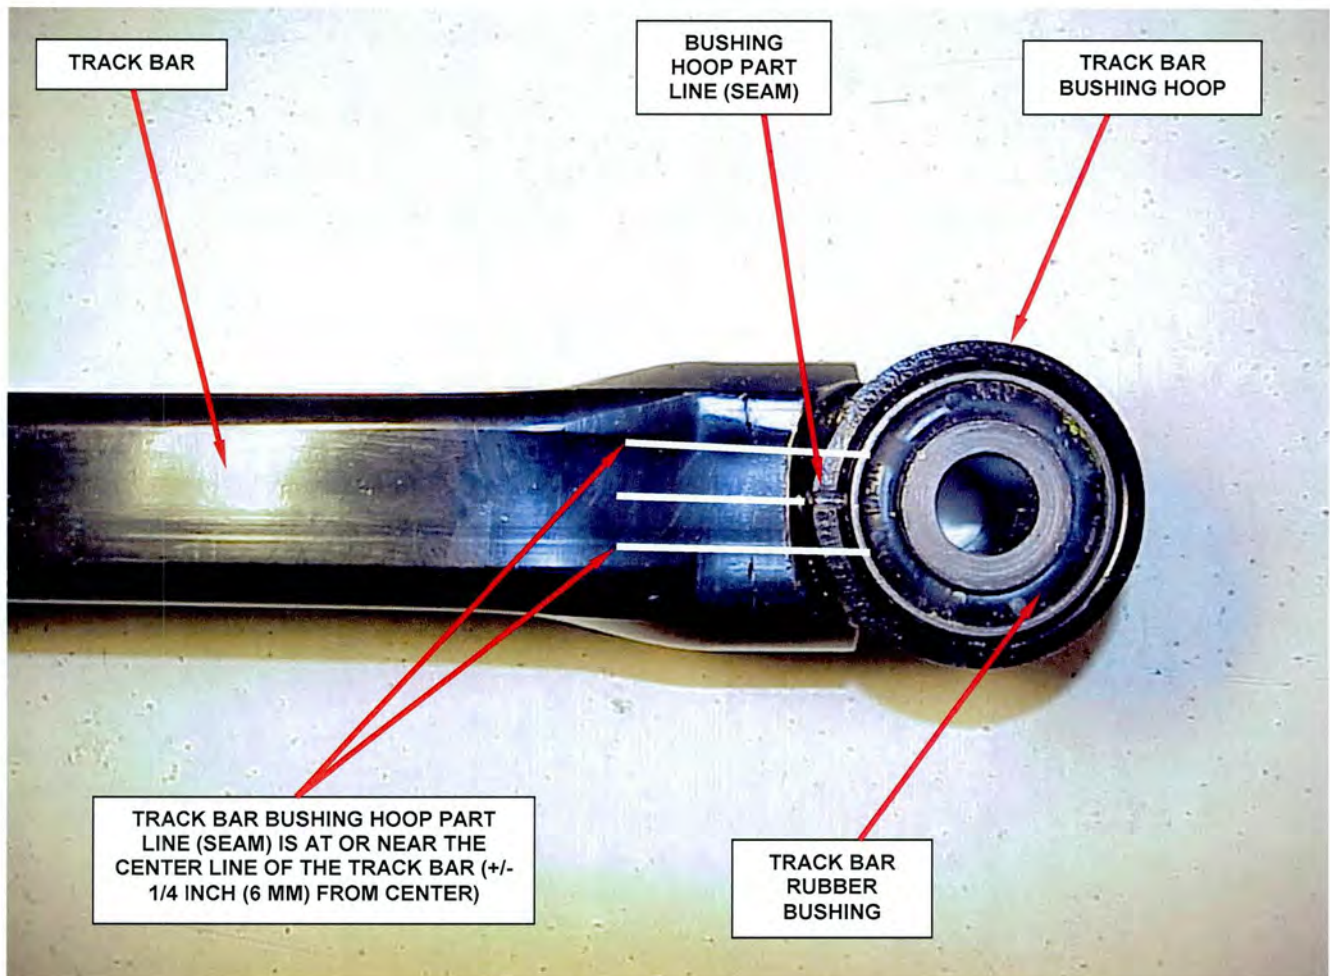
Inspect Bushing Hoop Part Line Location
